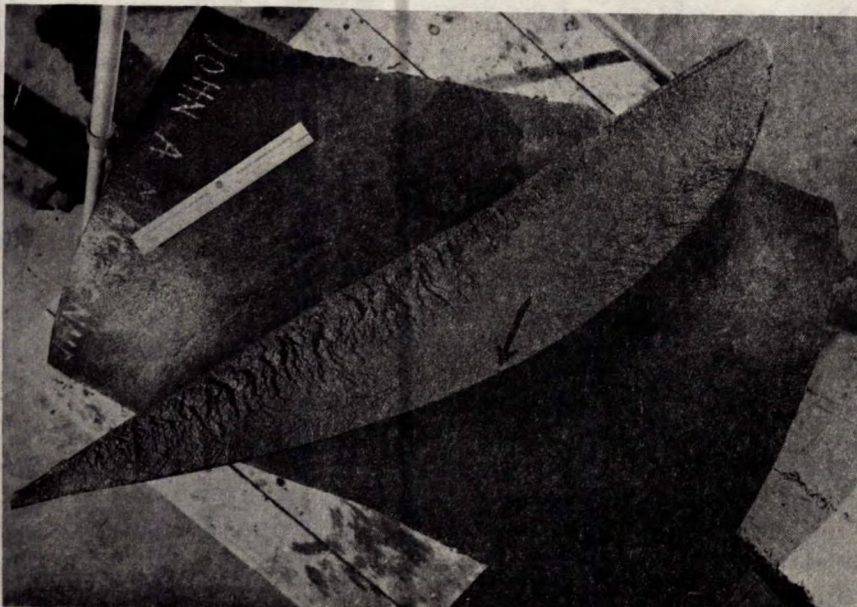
(a) illustrates the "as-received", appearance of the fracture origin. Figures 4(b) and 4(c) illustrate the origin after cleaning of the fracture with $SbCl_3$ derusting solution. A chevron pattern pointing to the origin is illustrated. The presence of chevron markings is suggestive of brittle fracture under application of impact load. The surface has been slightly altered by pitting since fracture, due to operation of the blade-stub in sea water after failure of one blade and by subsequent outdoor storage.
